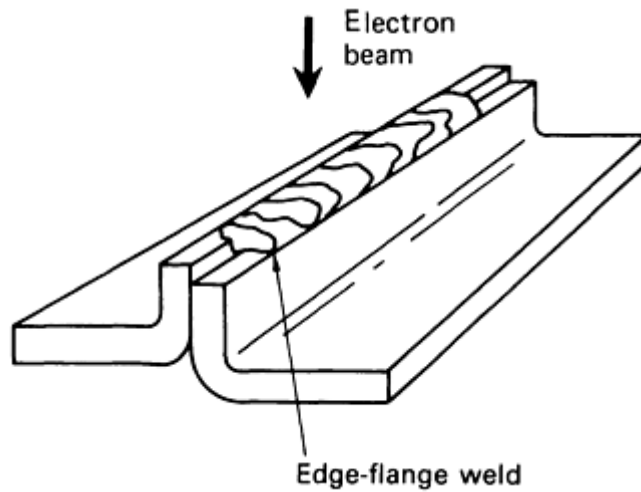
EDGE-FLANGE WELD TYPICALLY USED TO JOIN THIN PANELS
